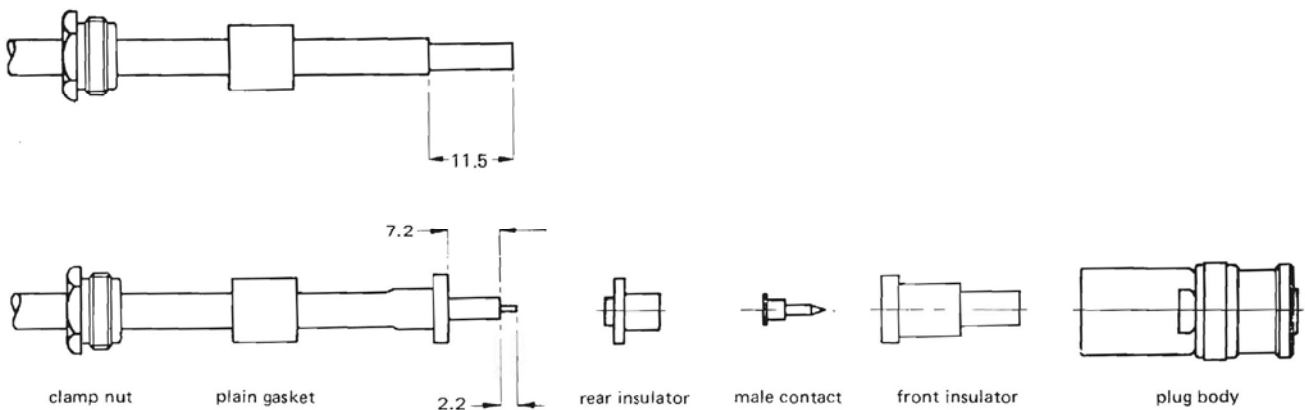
Elbow plugs: captive contact, improved UG style braid clamp
